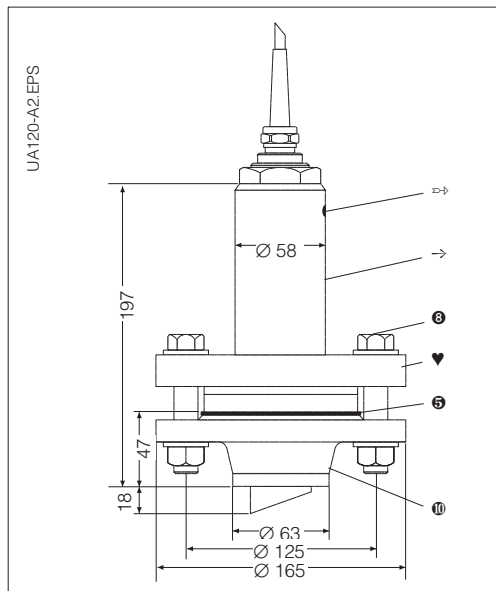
Dimensions CUA 120-A in welding adapter DN 50 (accord. DIN 2633)
